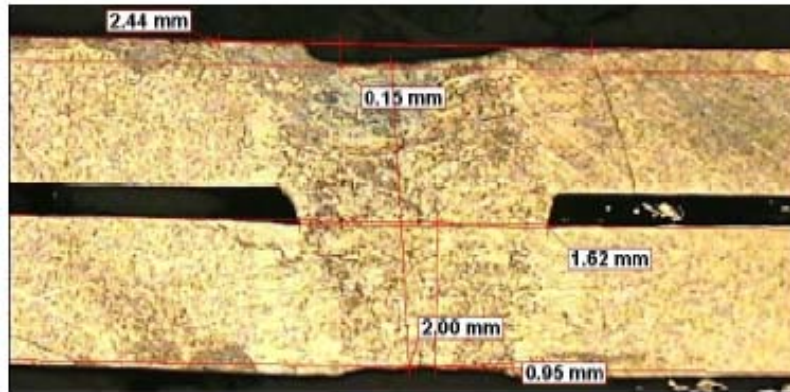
Microsection: Remote laser weld: 1.0mm to 1.0mm, DX54, 0.2 mm gap
